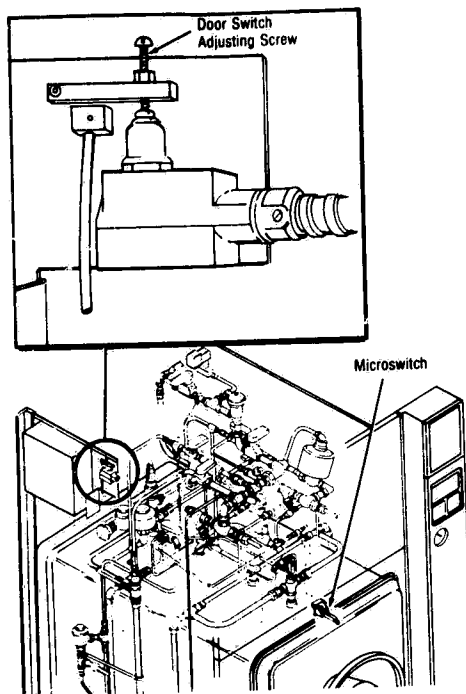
DOOR SWITCH ADJUSTMENT.
